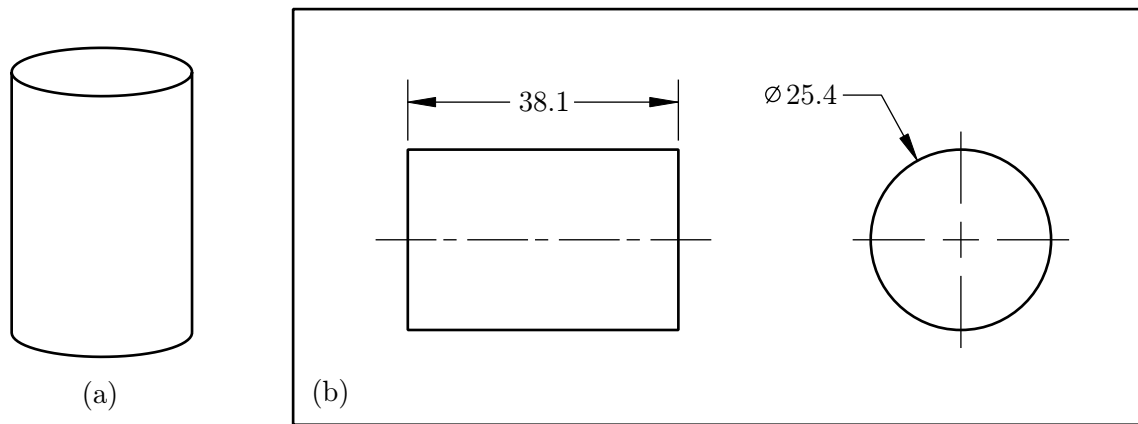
Specimen used for uniaxial compression experiments. All dimensions are in millimeters. (a) Isometric view of specimen. (b) Engineering drawing.
